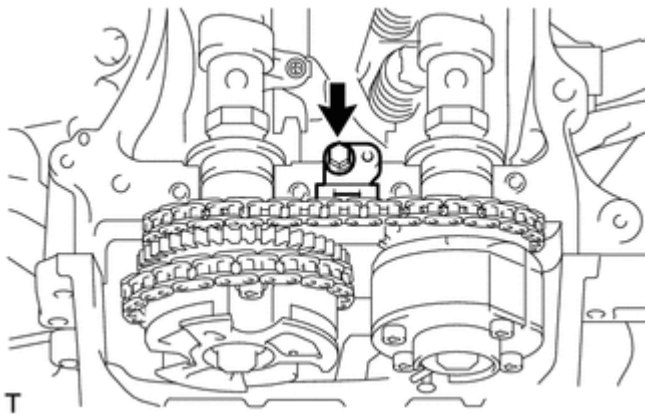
Identifying No. 3 Chain Tensioner Assembly & Fastener
